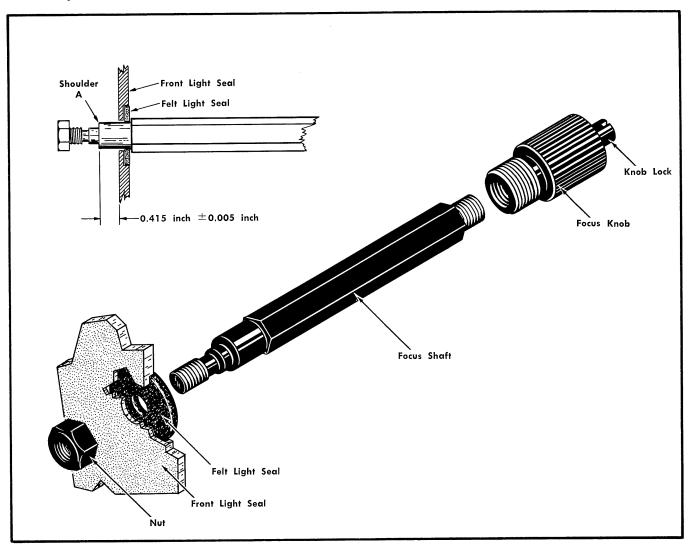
Illustration showing focus shaft group assembled into the Main Frame.
